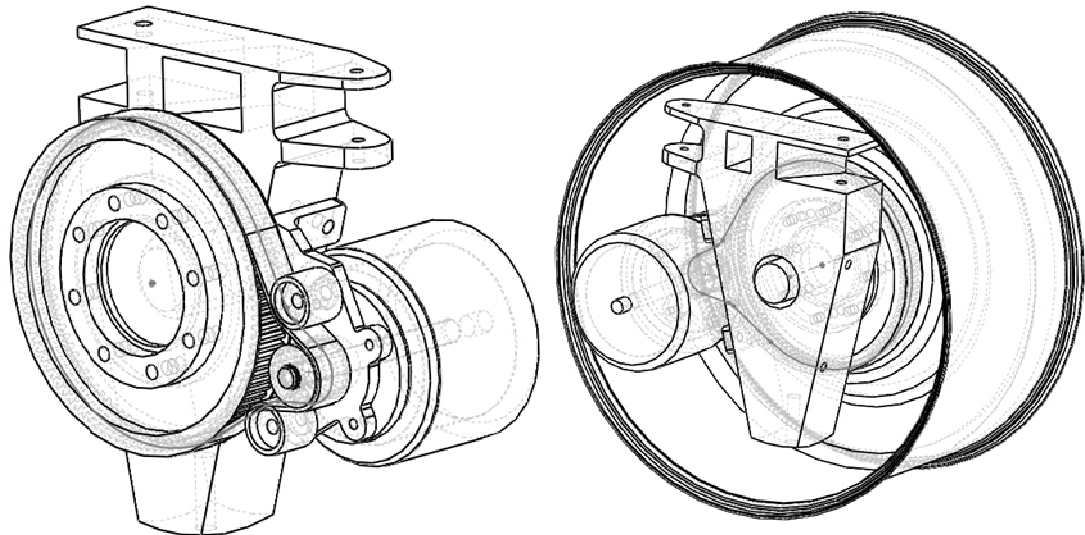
Single stage with the large axle pulley mounted between the wheel rim and upright.
